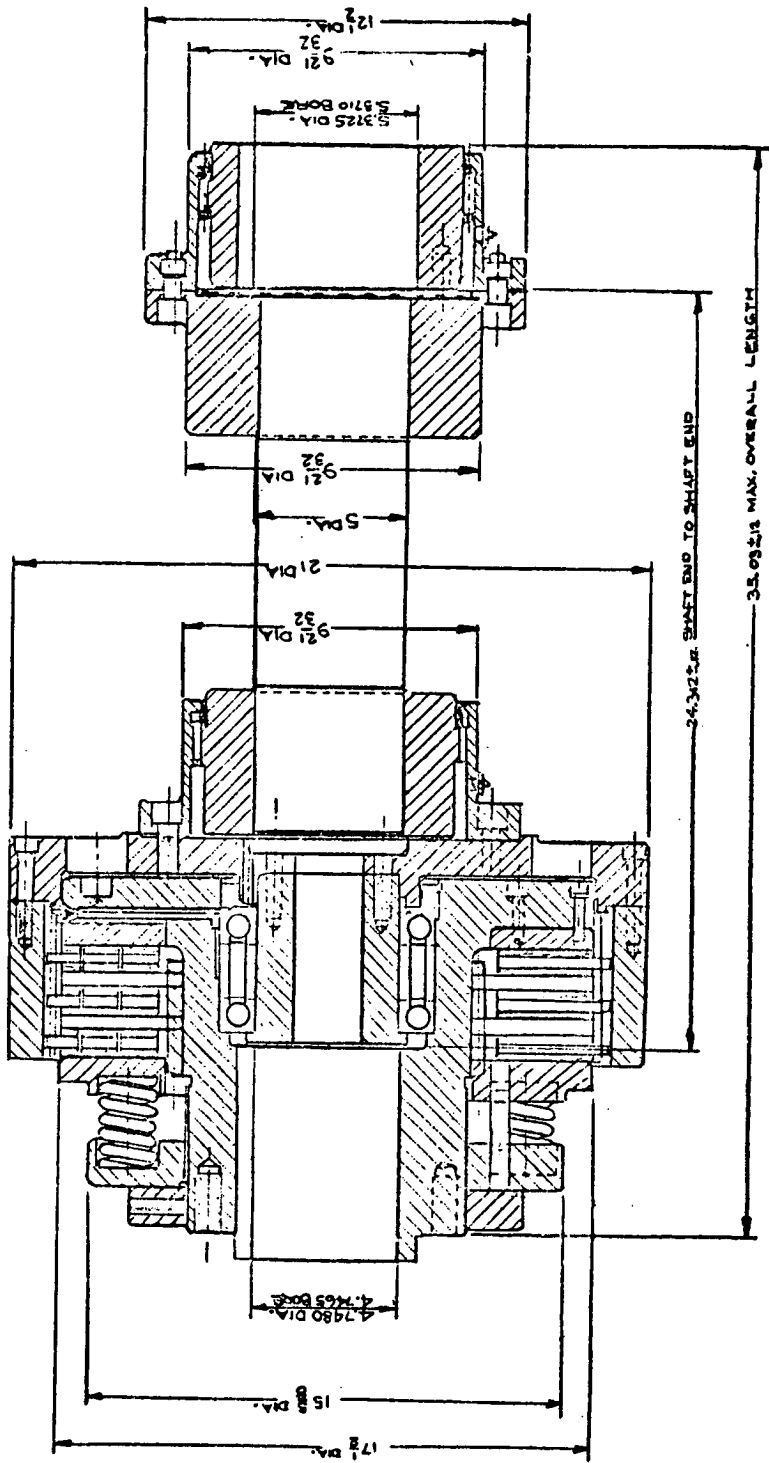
High Speed Shaft Assembly - Less Brake Disc
